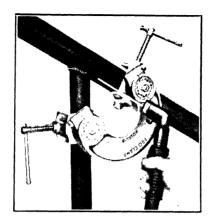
A special welding clamp that holds parts in almost any-position relative to each other. Protractor scales are built into each clamp which enables the operator to accurately adjust the device to any angle
